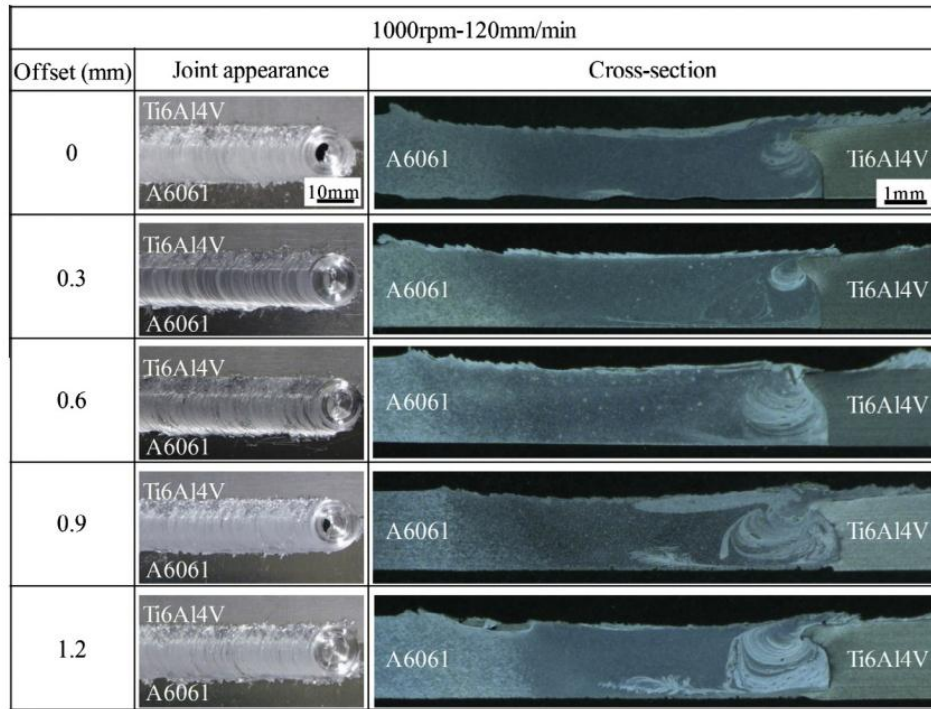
Surface appearance and cross-section images of Al-Ti friction stir welds produced by various probe offset distances [18].
